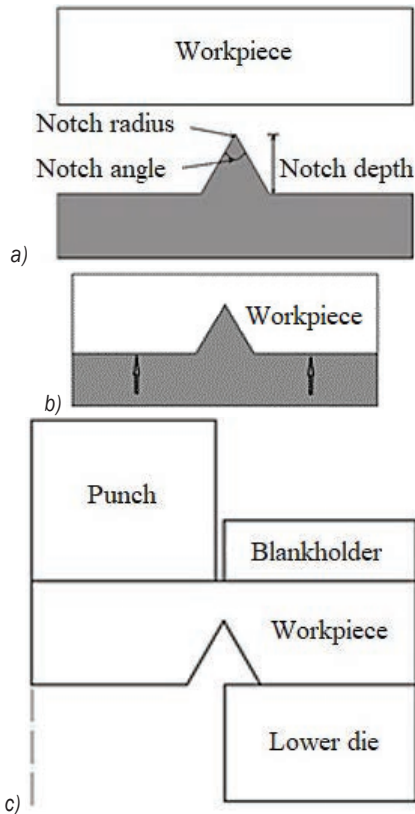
The illustration of the steps of notch shear cutting and related components; a) manufactured indenter with predetermined notch properties, b) formation of notch on the workpiece and, c) conventional piercing of the notched workpiece
